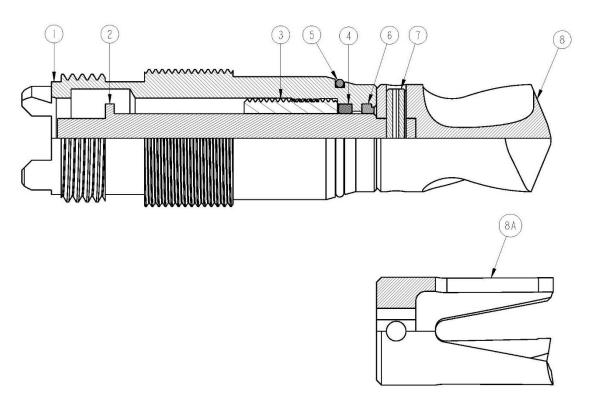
MH Cutter Assembly (HA102010) HP Cutter Assembly (HA102015)
